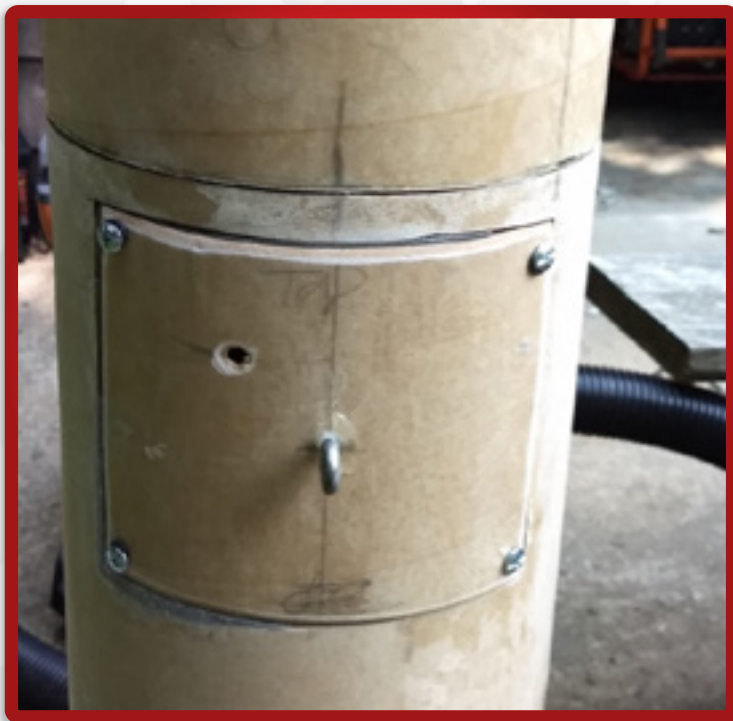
HATCH COVER BOLTED ON WITH O-RINGS
